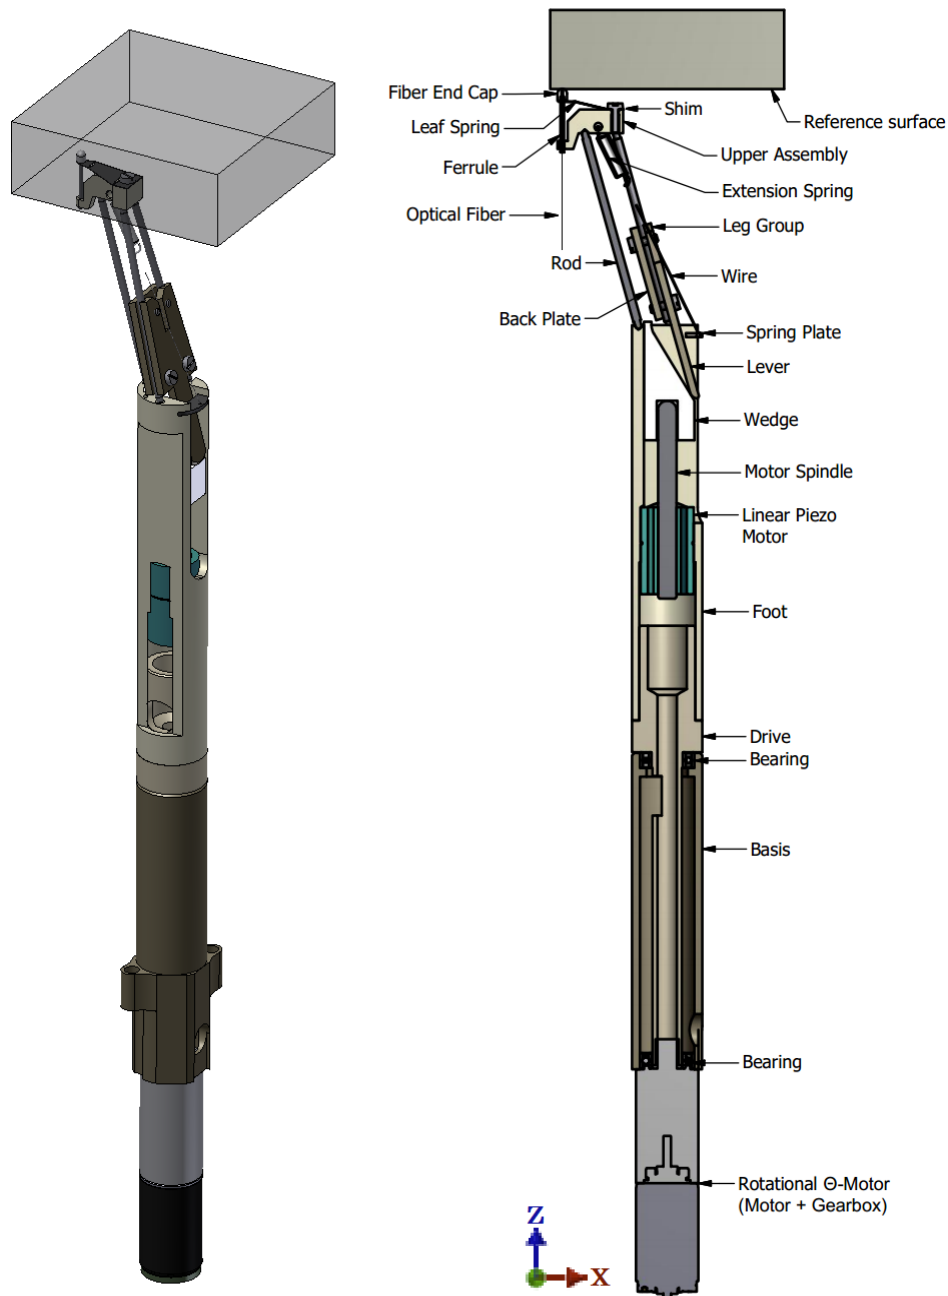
Mechanical design and elements of PotsPos actuator (hollow shafts in the motor and gearboxes not shown).
